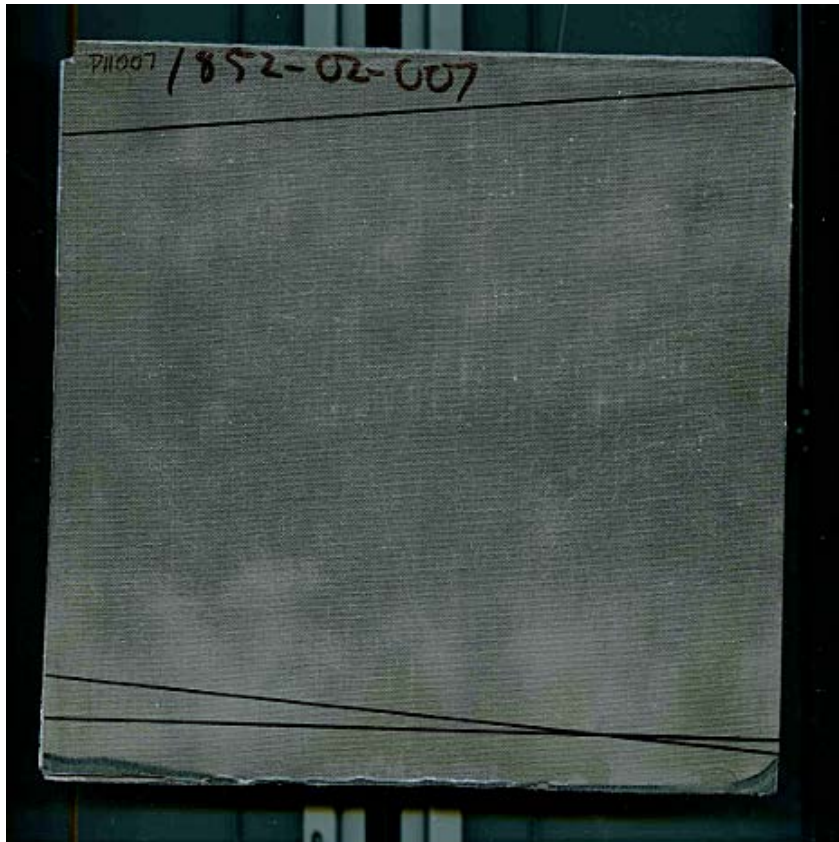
Optical photograph of a CMC panel shown with identification markings in preparation for machining into dogbone test specimens
